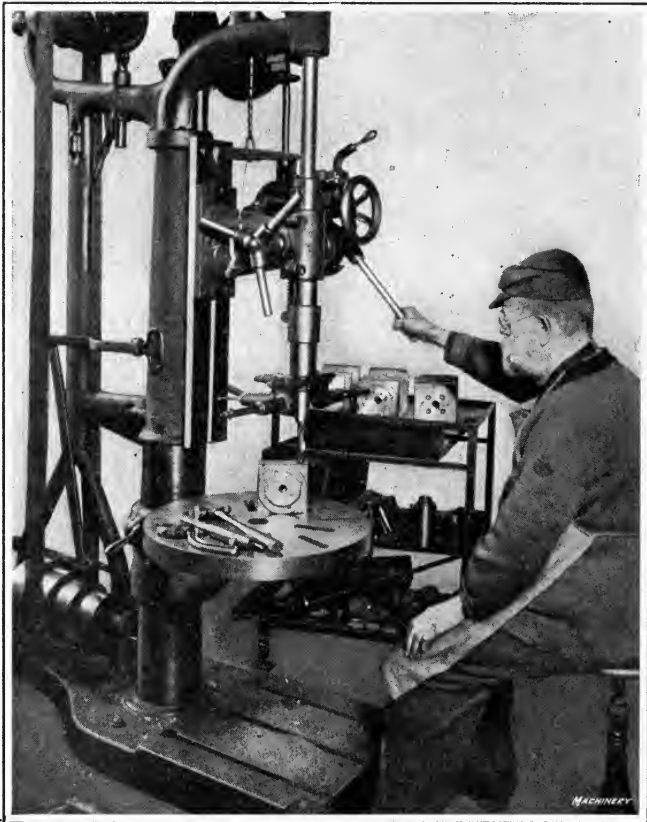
Auxiliary Turret Head to adapt Single-spindle Drilling Machine for Rapid Performance of a Sequence of Operations
